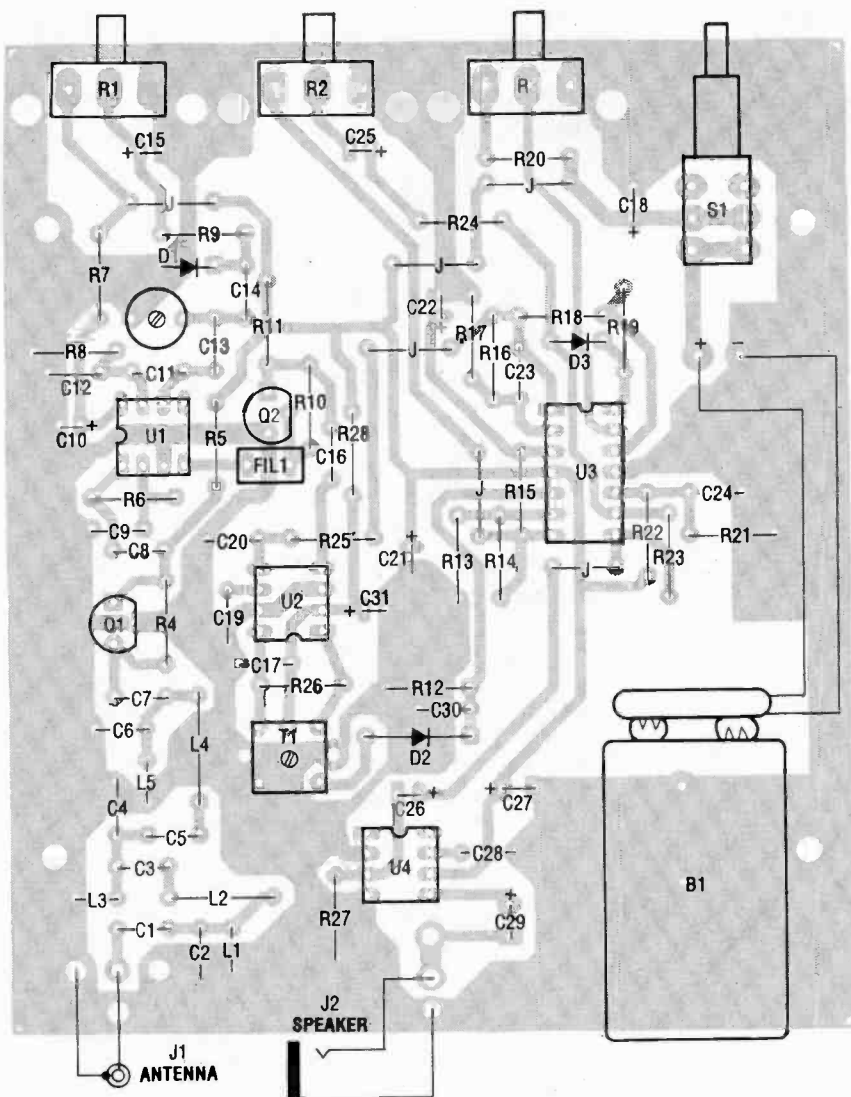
Use this parts-placement diagram as a guide when assembling the printed-circuit board
